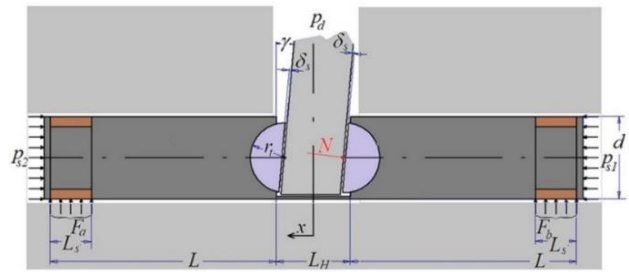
Scheme of loading the swash plate–slippers–piston–cylinder assembly.
